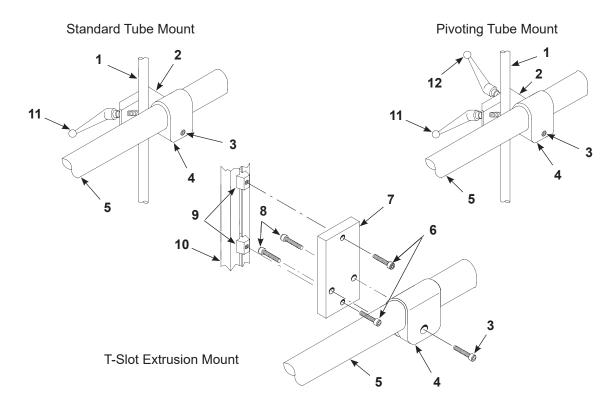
Tube-Mount Spray Gun Kit Mounting
